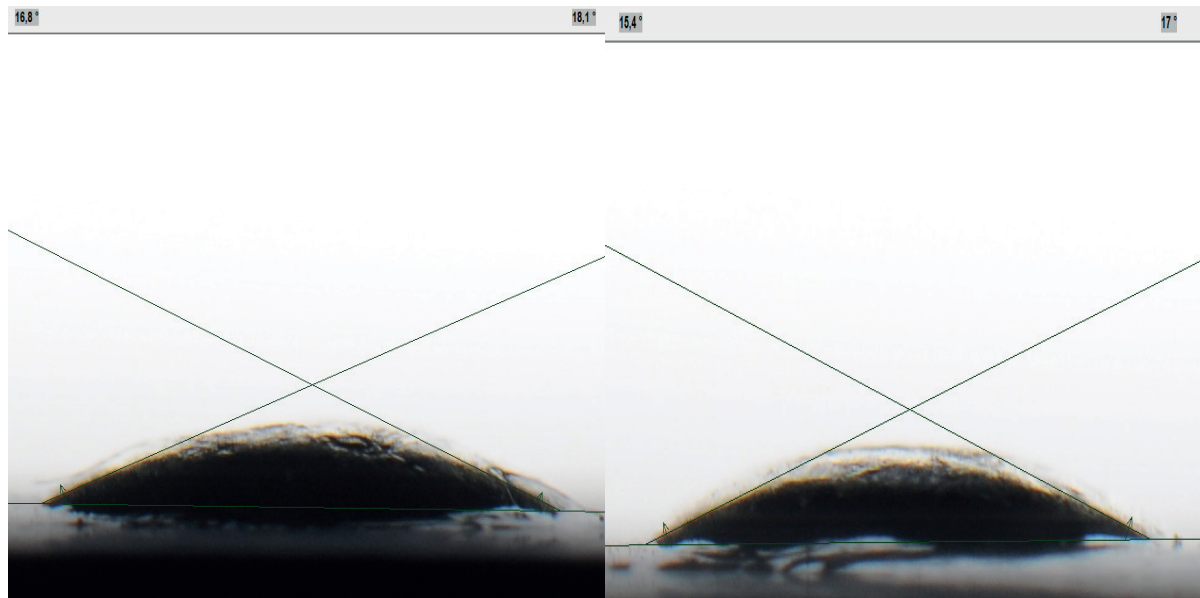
Images of contact angle measurements of soldering made on laser treated DP600 plate
